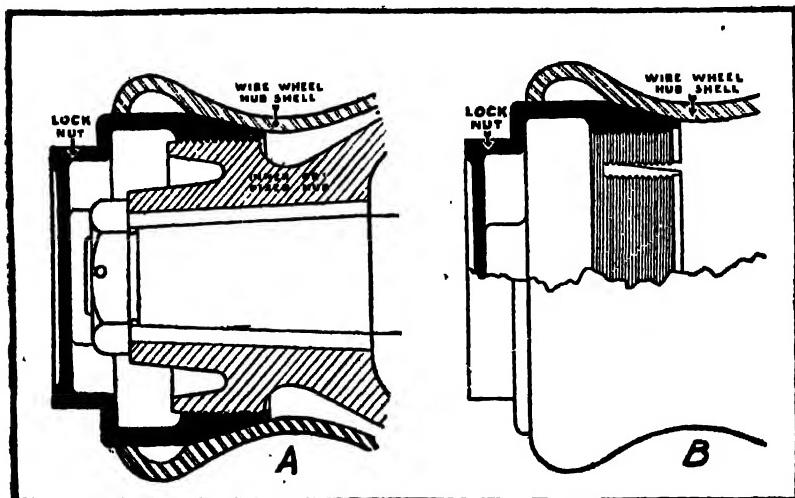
Showing the Automatic Locking Nut Employed on the Houk Wire Wheel.
